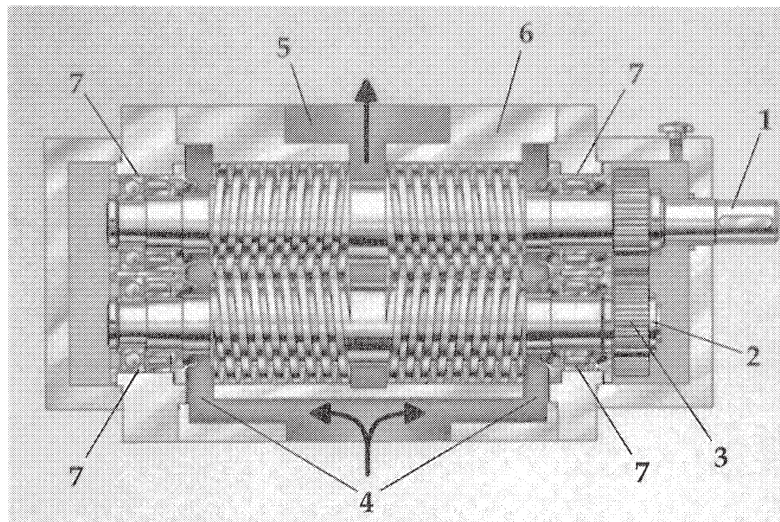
The inside structure of a twin-screw pump (1.Driving shaft; 2.Driven shaft; 3.Gear; 4.Suction; 5.Discharge; 6.Housing; 7.Bearing) (from Vetter et al. (2000a))
